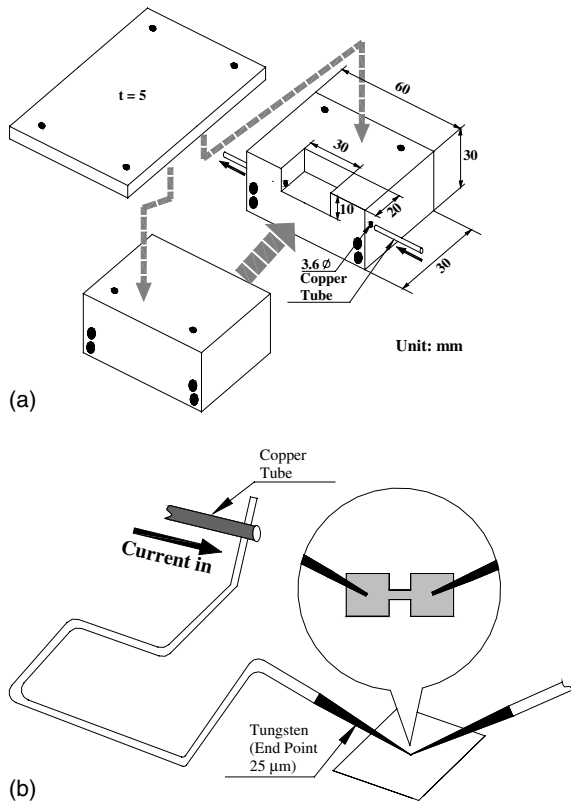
Schematic of acrylic chamber and tungsten probe tip contacting on driving pads.
